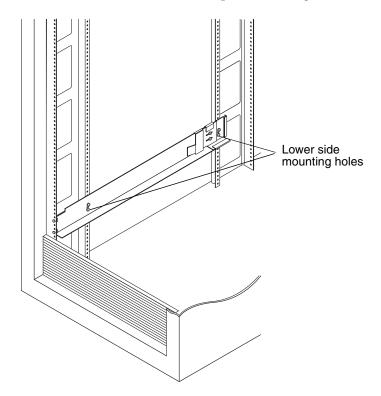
Inserting Screws in the Lower Side Mounting Holes of the Cabinet
